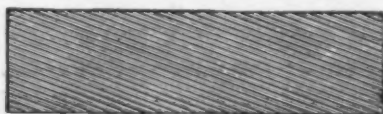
The Surface Appearance of a Right-Hand Die.
